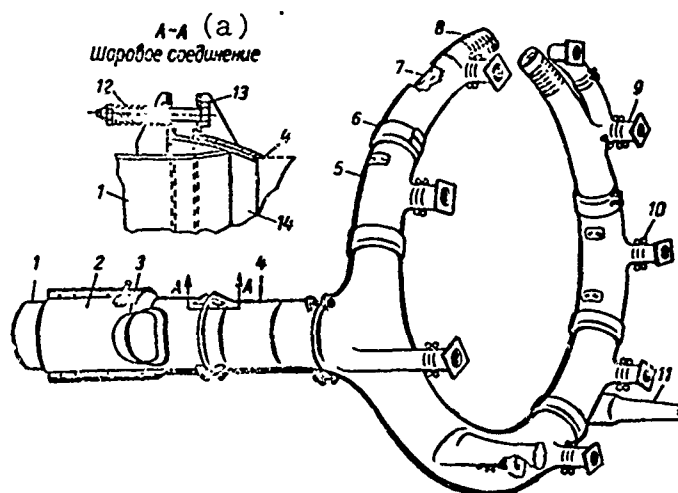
The exhaust system (exhaust manifold): 1 - exhaust pipe; 2 - heat exchanger jacket (fairing); 3 - cold air intake; 4 - pipe; 5 - section of manifold; 6 - tightening clamp; 7 - flame tube; 8 - flexible hose; 9 - pipe to exit slots; 10 - tightening half-clamp; 11 - air scoop of flame tube; 12 - spring; 13 - bolt; 14 - half-sphere of articulated joint.
